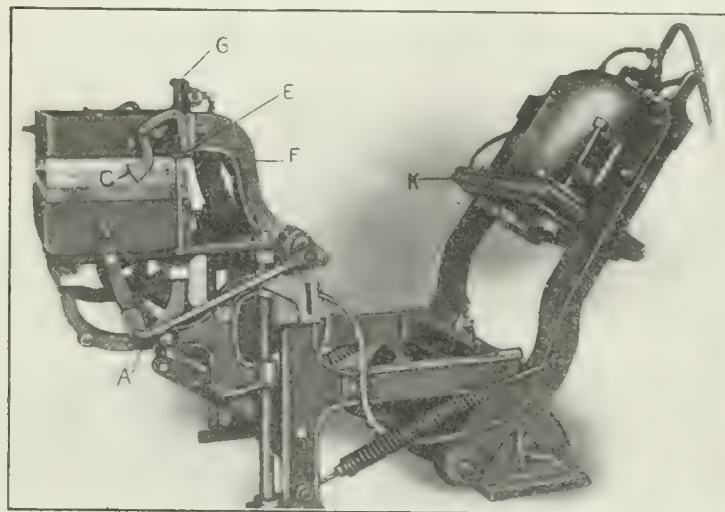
The Machine with the Ramming Head Swung Back and the Cradle Rolled Over.
